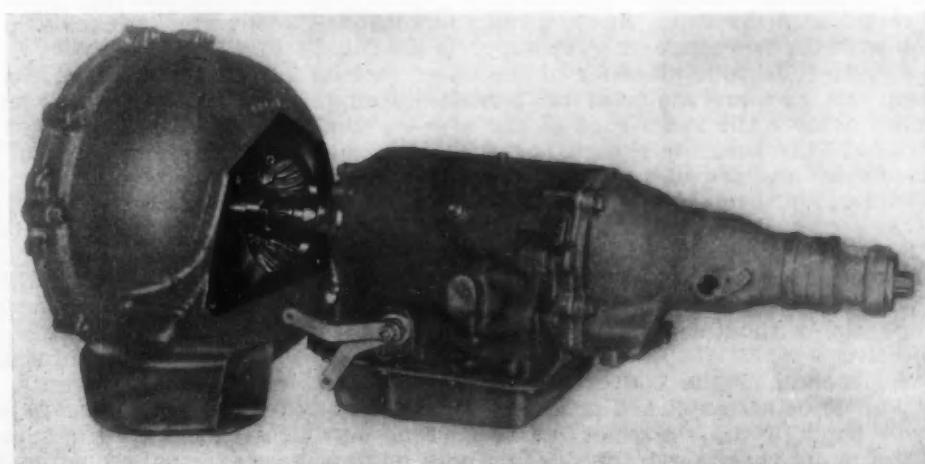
The gear box can be disassembled from the converted assembly by removing four screws
